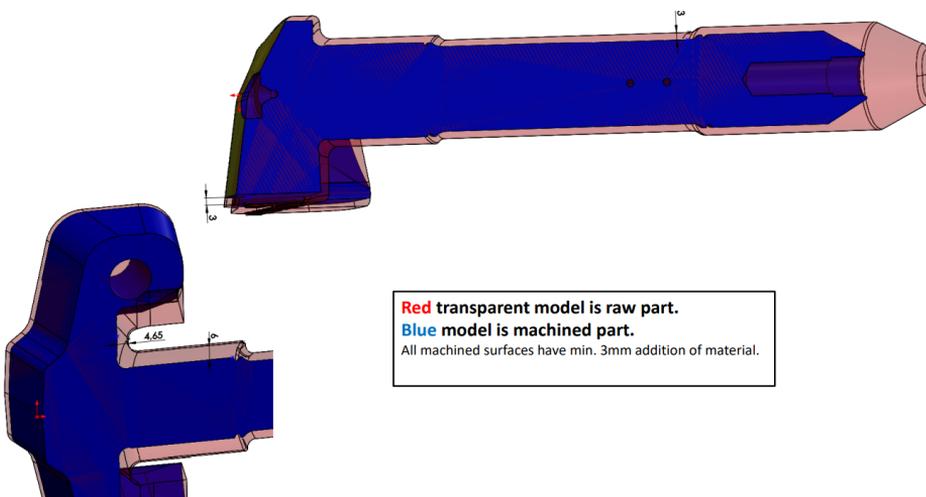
A cross section of a 3D model of a raw and machined part [9]
